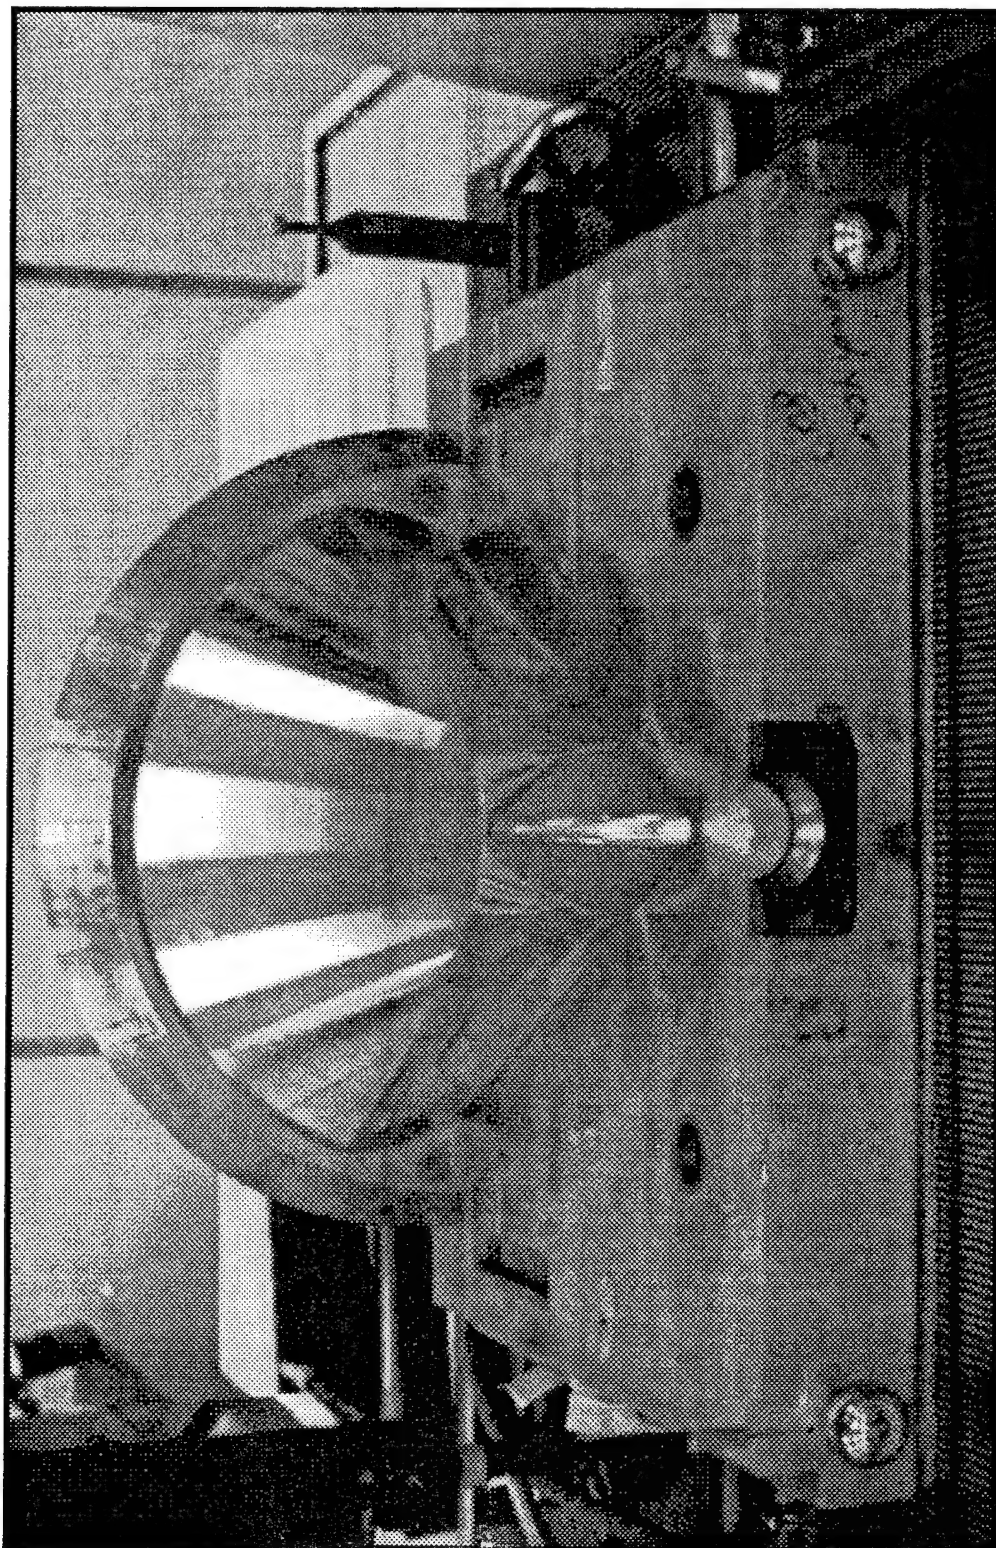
Core Half of Cone Mold with Tooling Spheres.
